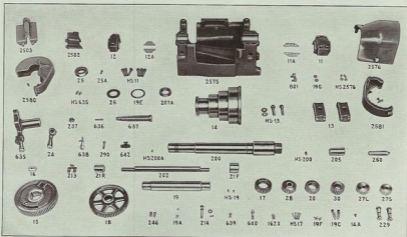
Headstock Parts for Series "S" South Bend Lathes.
